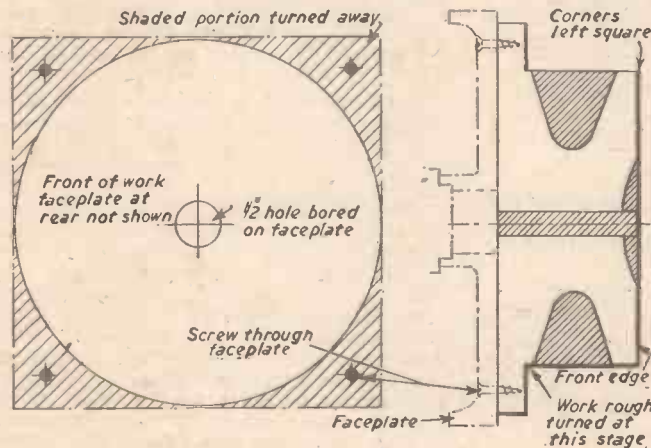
and 4 (left).—Fig. 3 shows the work-piece marked out and Fig. 4 is a side view of the faceplate and work.
